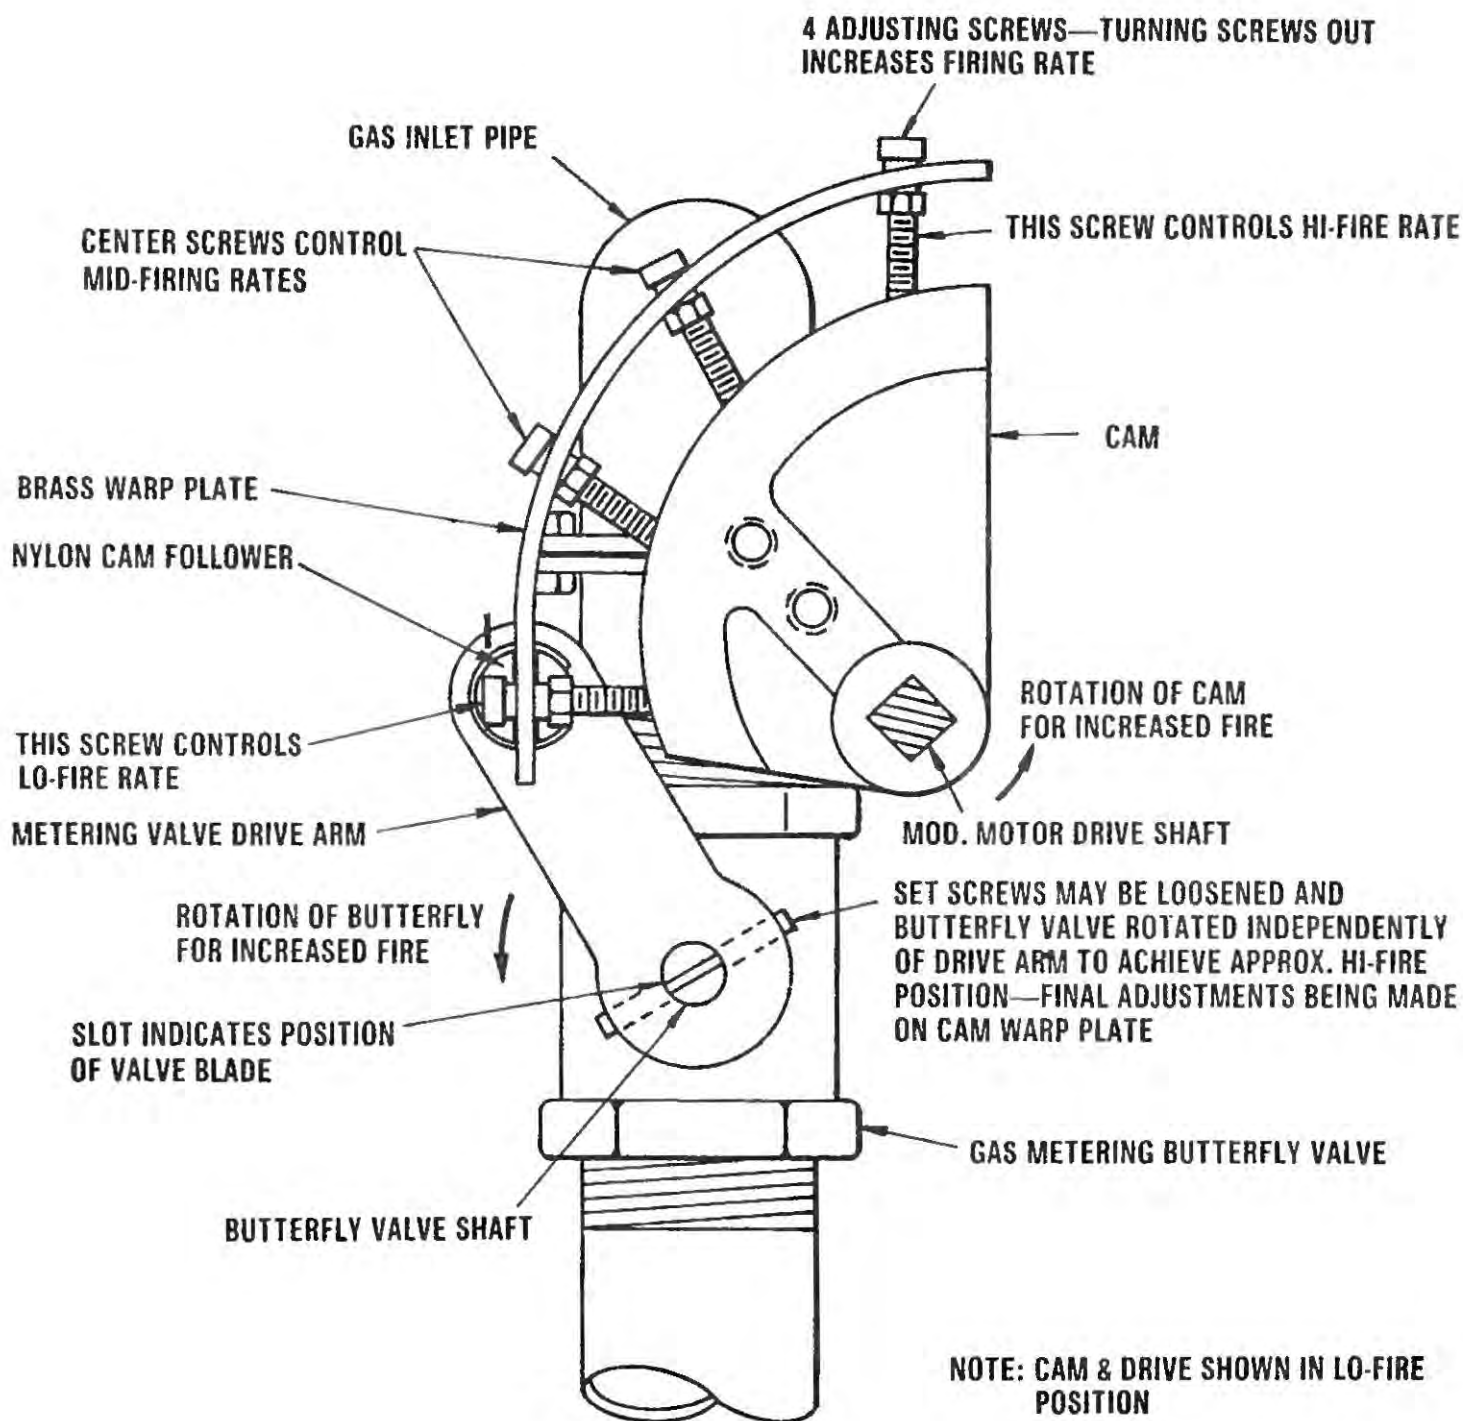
GAS METERING VALVE DRIVE ADJUSTMENTS 100 THRU 400 HP.
